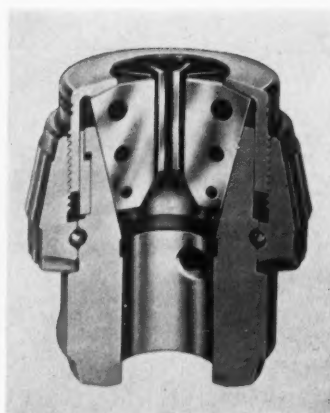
Jacobs collet chuck with No. 5 Jacobs taper back mount
